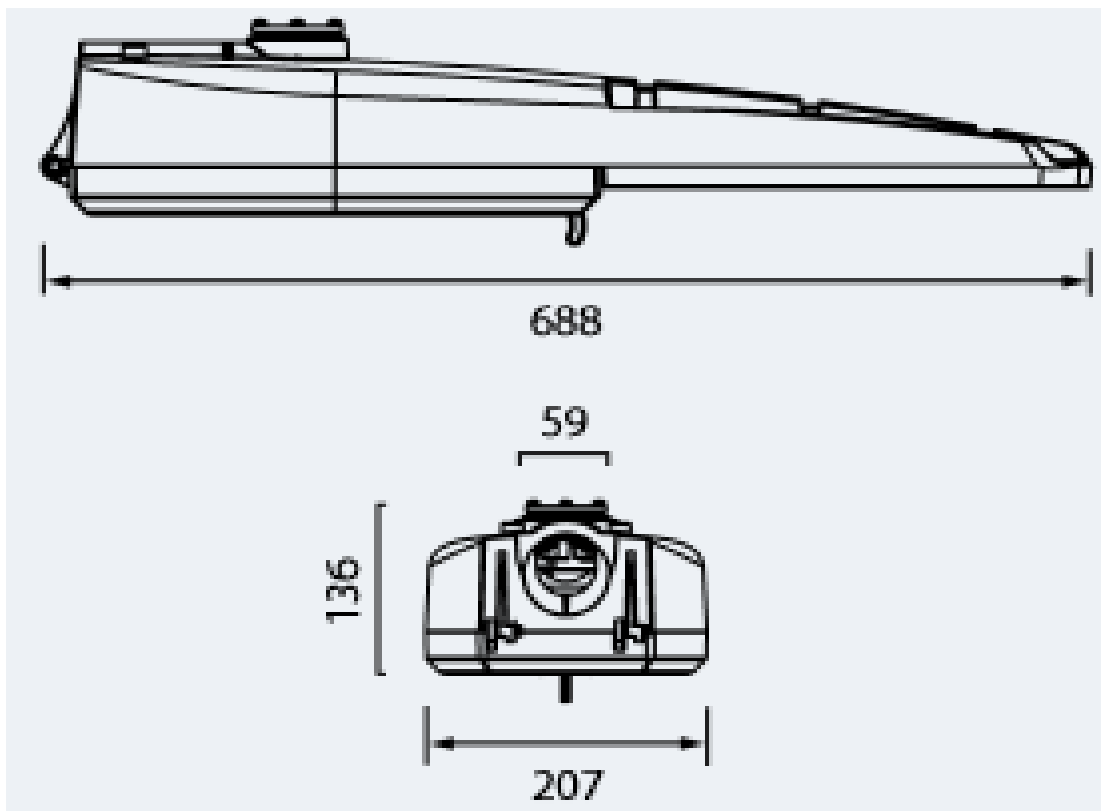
Product dimensions for model - FTS 10LED 22W driver - 929000991206
